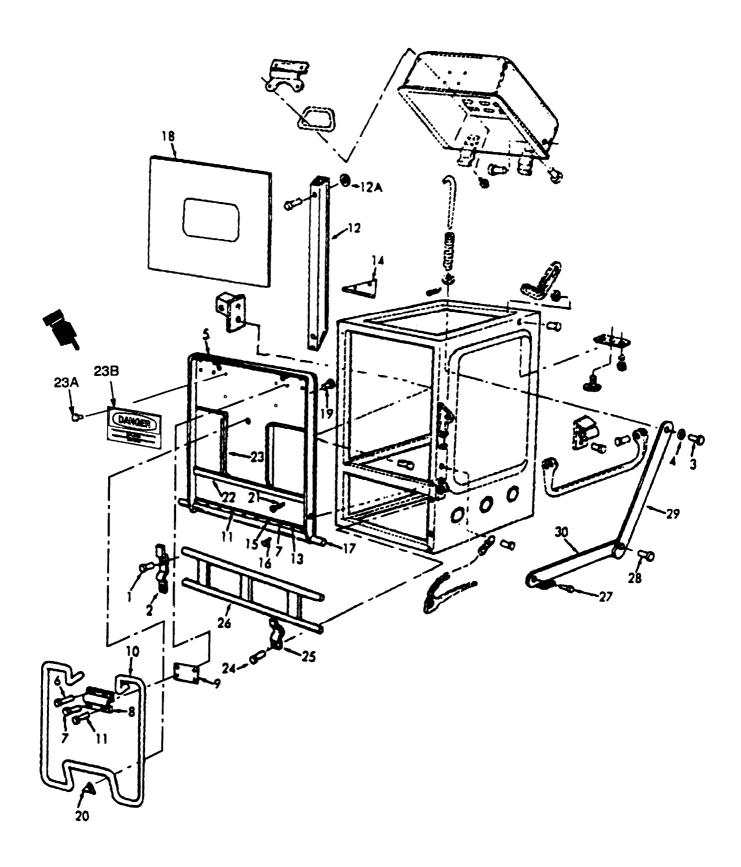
Cabinet Assembly (Sheet 1 of 3)
